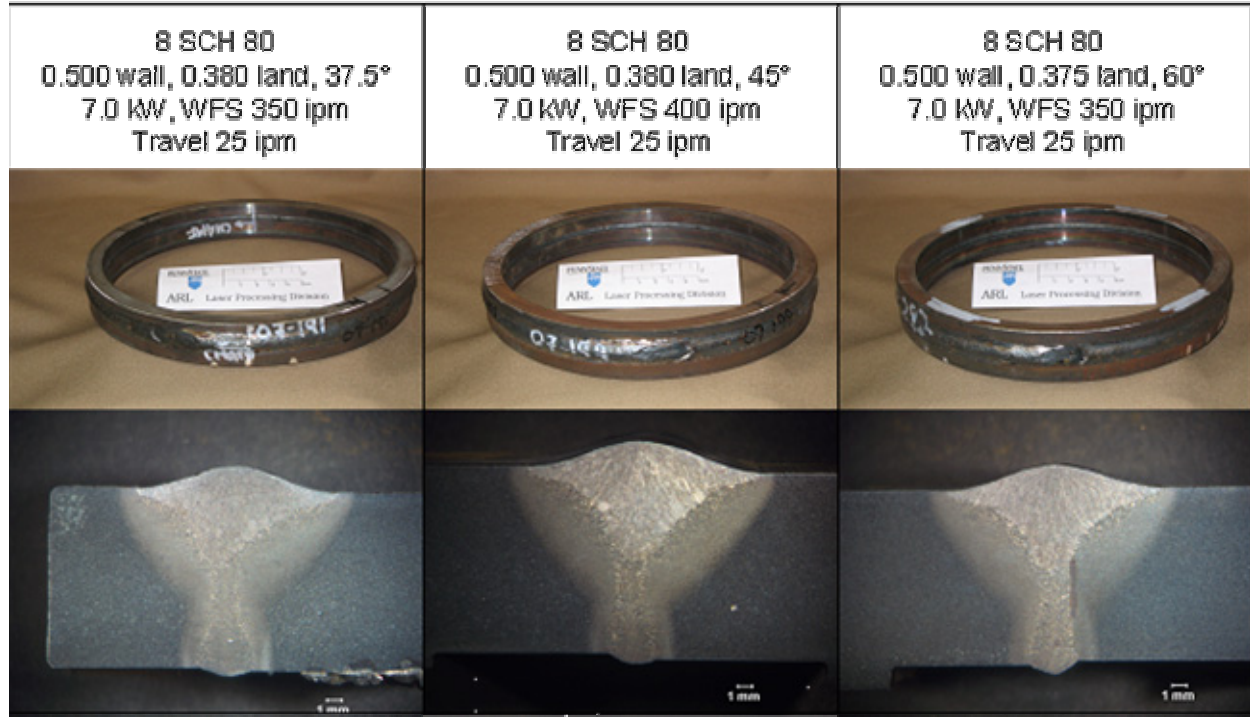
Investigation of varying bevel angle. The welded pipe is shown, with macro sections.
